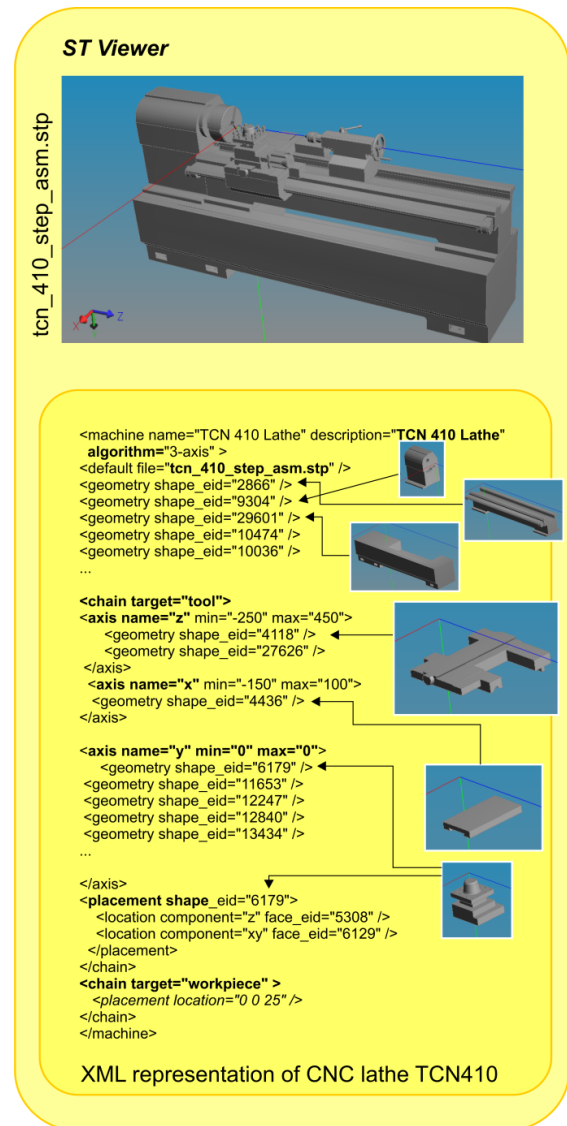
STEP and *.XML representation of CNC Lathe TCN410 for machining simulation in STEP-NC Machine environment
